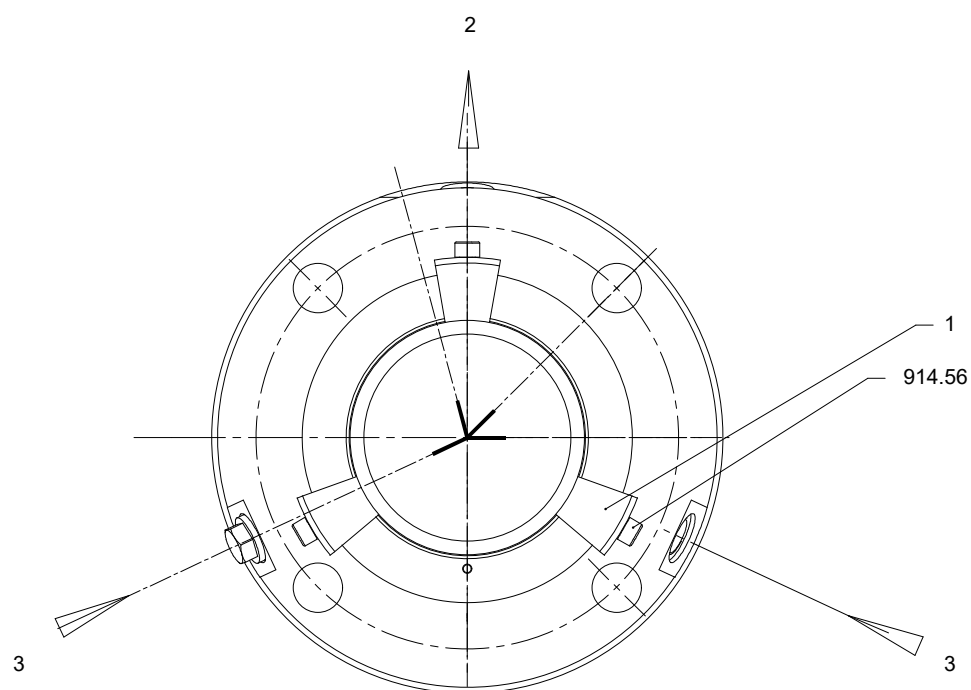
4RDQ general assembly drawing - view: Cross-section axis
